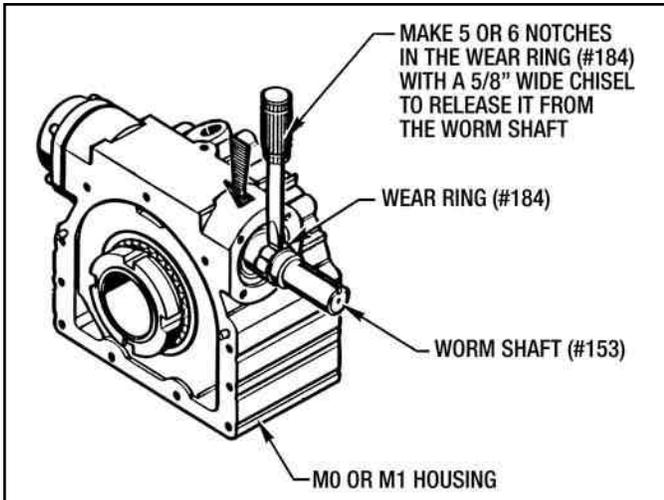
Removing Wear Sleeve (#184) From Secondary Input Worm Shaft (M0 and M1 Models)
